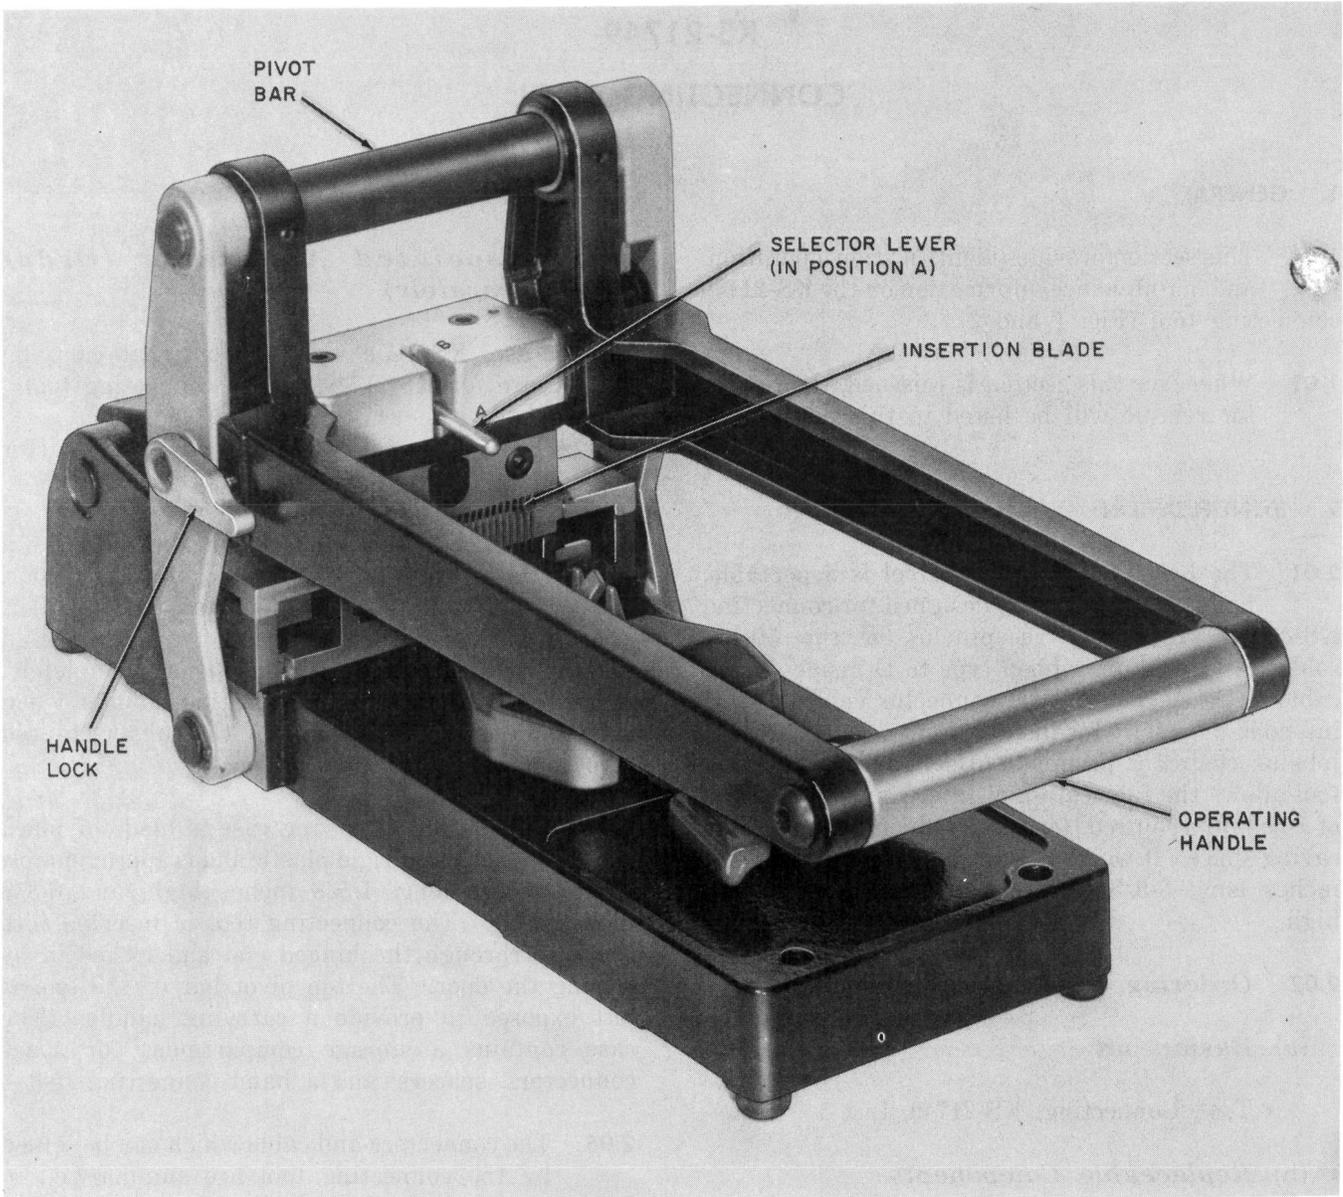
KS-21749 Connecting Tool, Front View With Handle Closed
